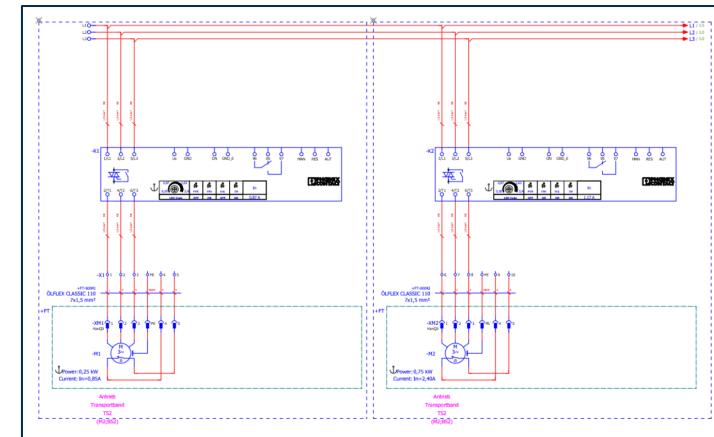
Conveyor Drive Motor, Starter, Terminal Strip represented as a Window Macro
